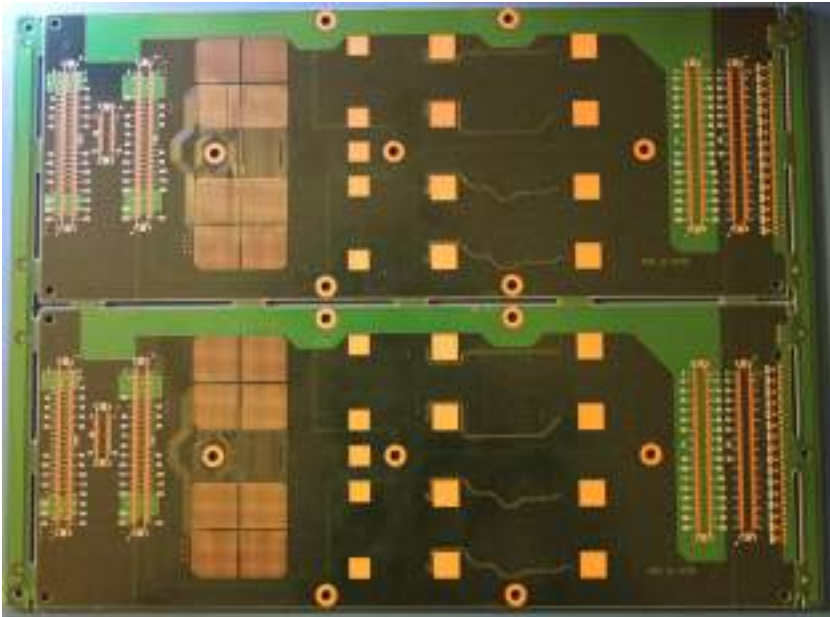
A PCB panel, ready for assembly. This panel has two PCBs on it and is supported on the left and right side by the conveyor.
